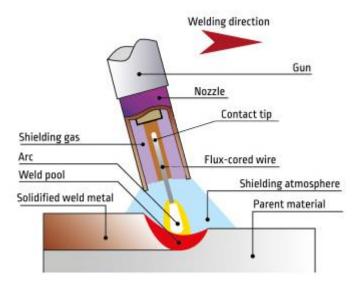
MAG welding process (Lincoln Electric, 2019a)
